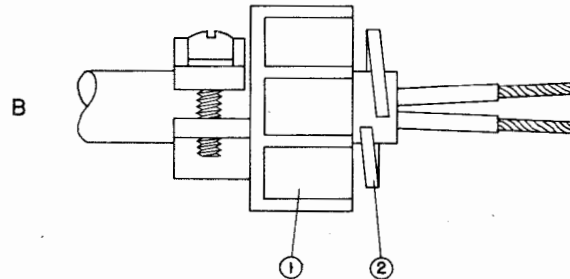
Assembly of Plug UG-260/U to RG-59/U Cable for External Tone Input Connections
